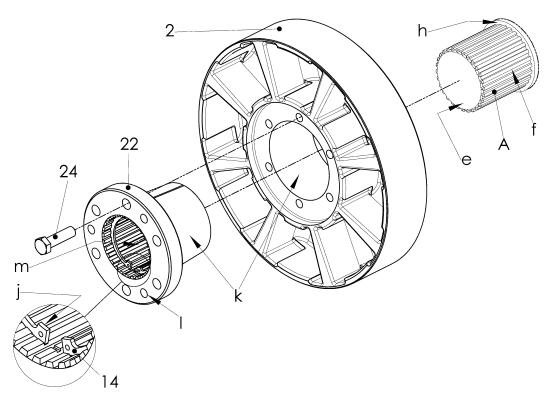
Mounting the outer part (2) with CENTA-conical clamping
